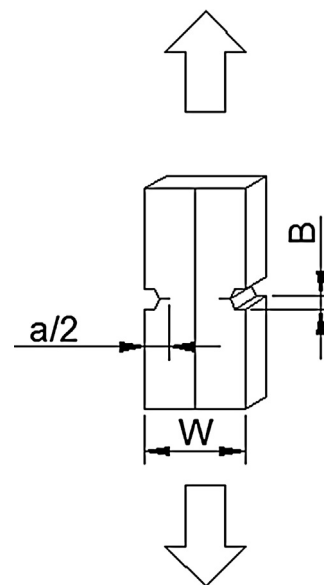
Schematic showing a deeply double edge-notched specimen (DENT) considered for fracture tests.
